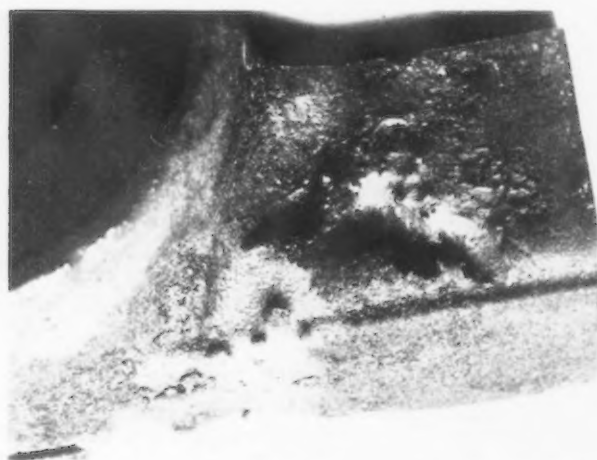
Appearance of casting defect caused by excessive moisture in the sand (above).
